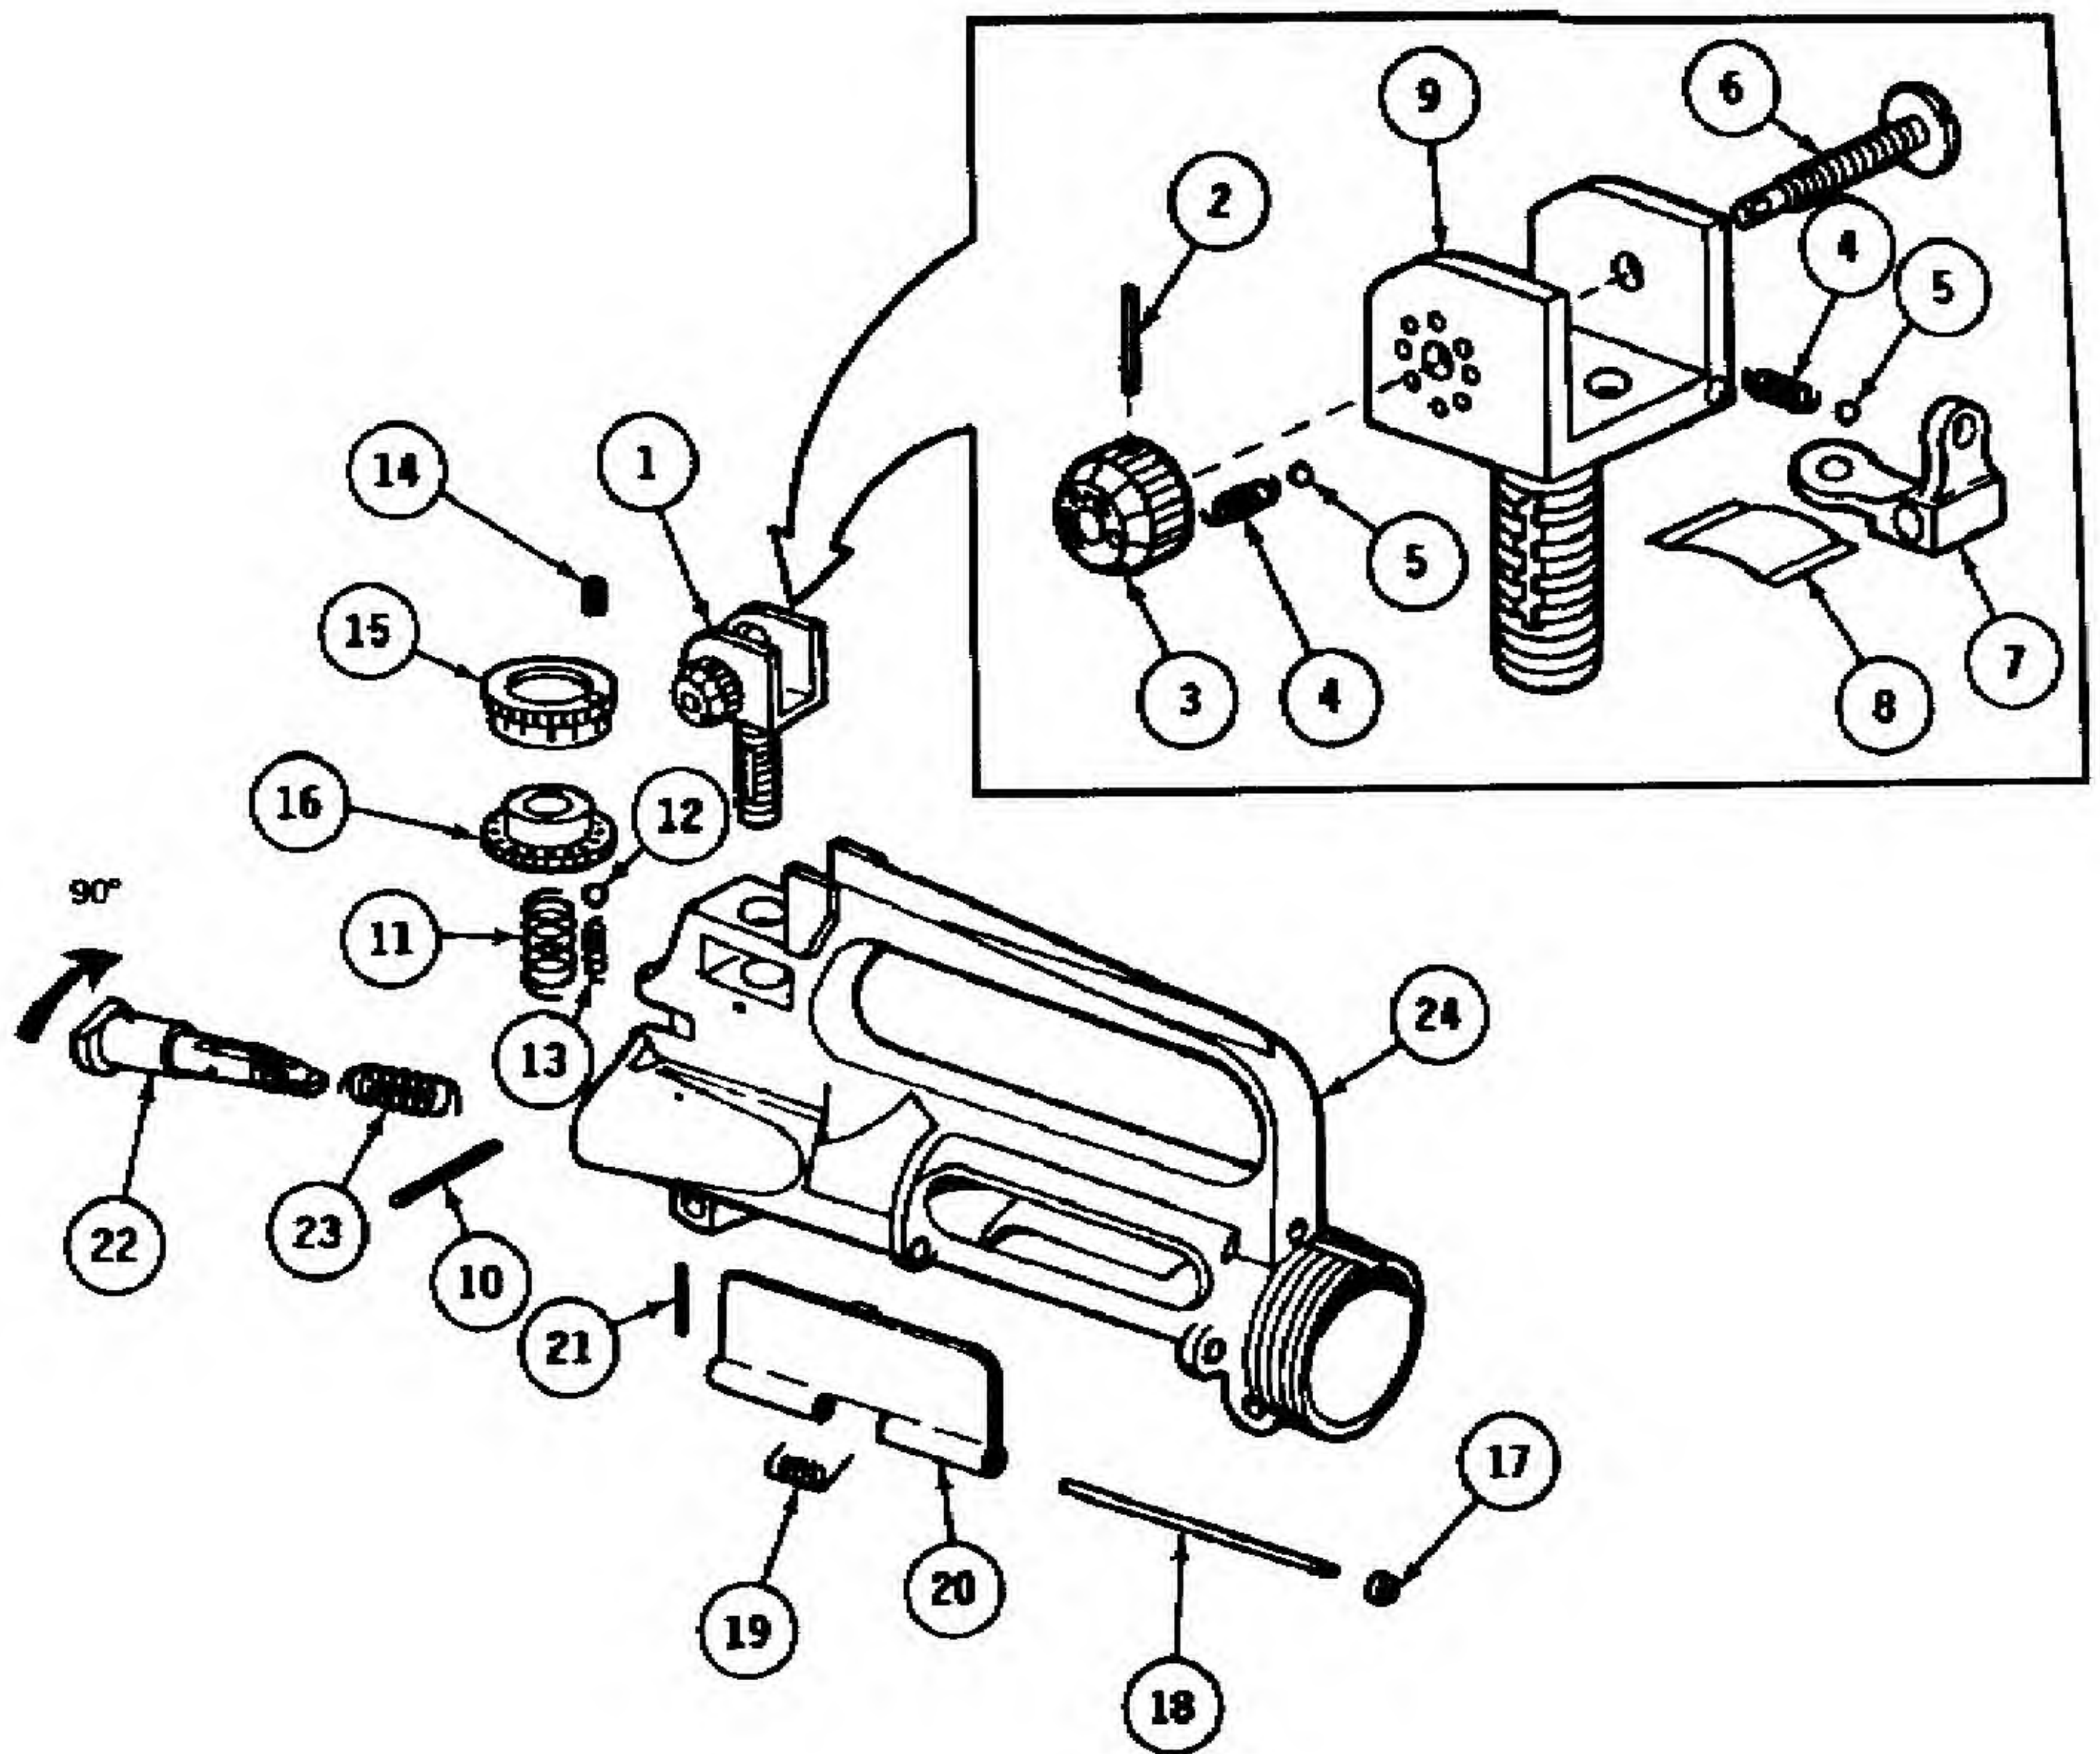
Upper receiver assembly 9349062 and rear sight assembly 9349072
